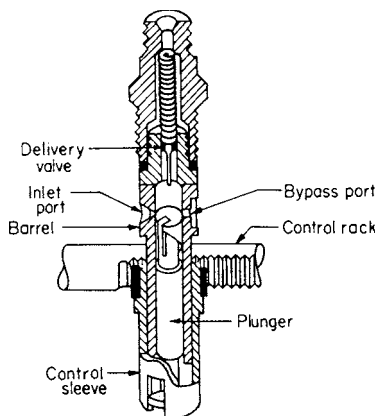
Bosch plunger, barrel, and delivery valve assembly.
